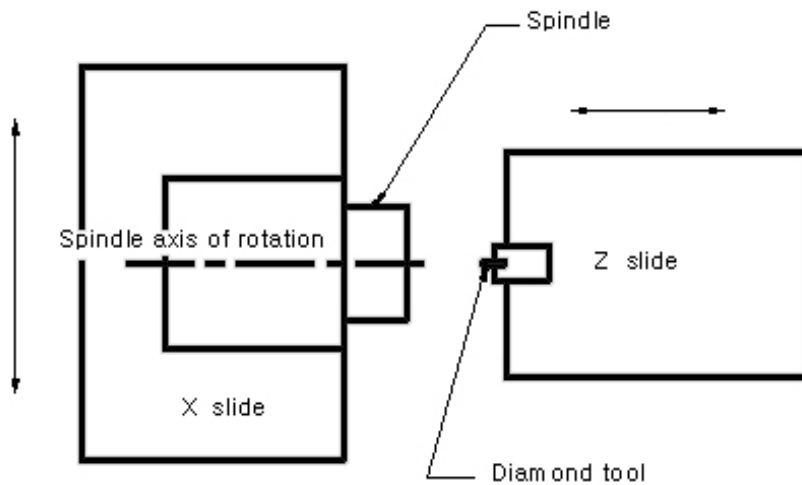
Top View of Schematic Drawing of Diamond Turning Machine
